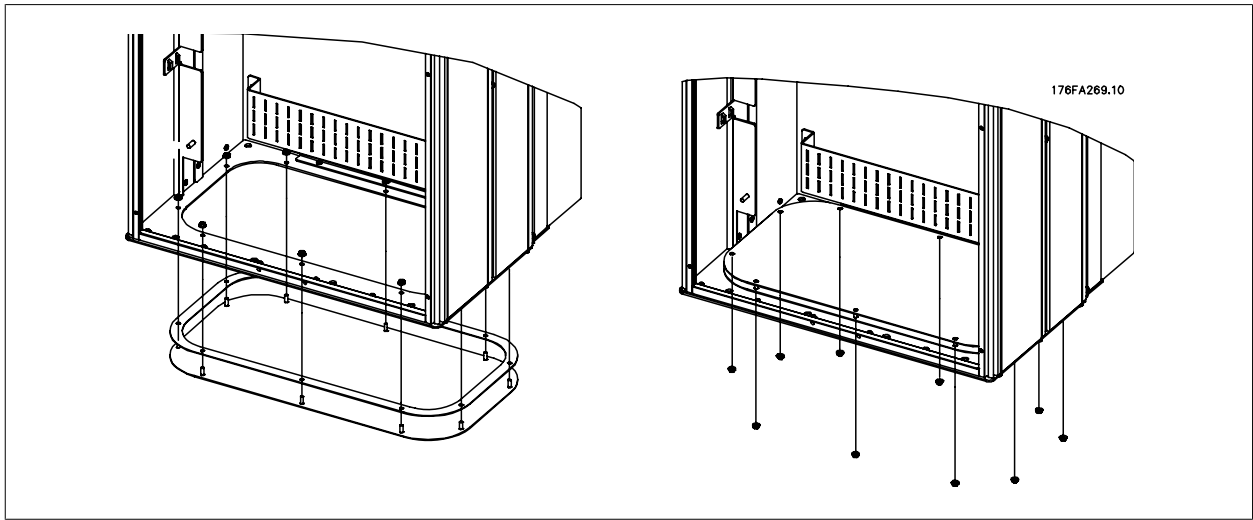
Mounting of bottom plate,Frame size E1.
